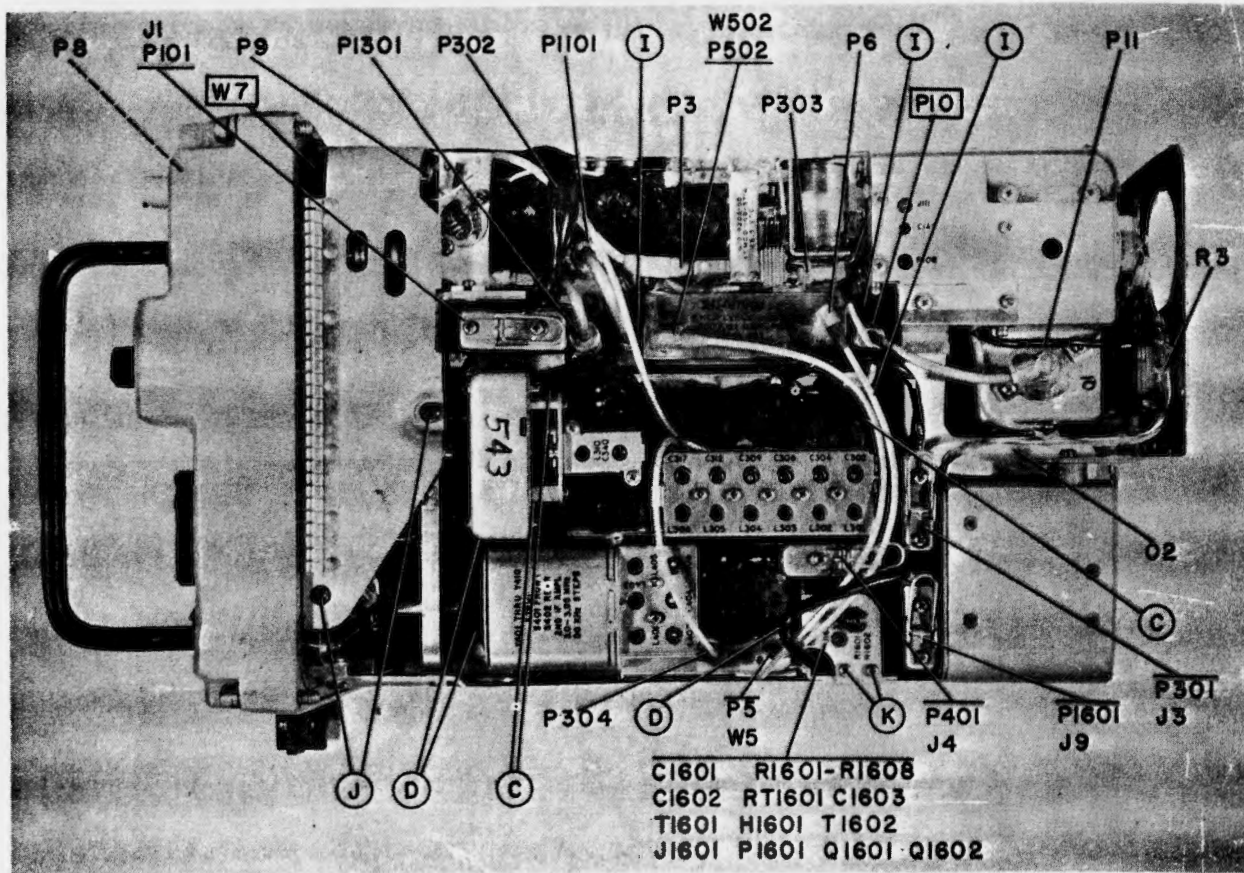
Receiver-Transmitter RT-581( )/URC-9, Right Side, Subassembly Removal
